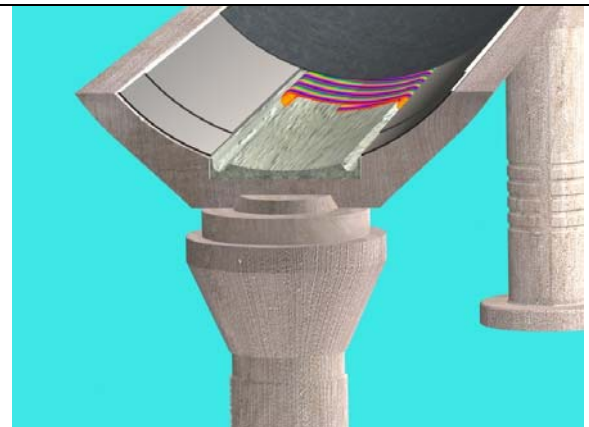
Expanded view illustrating the motor winding and structural insert. The emergency exit walkways and water drainage details are not shown.
